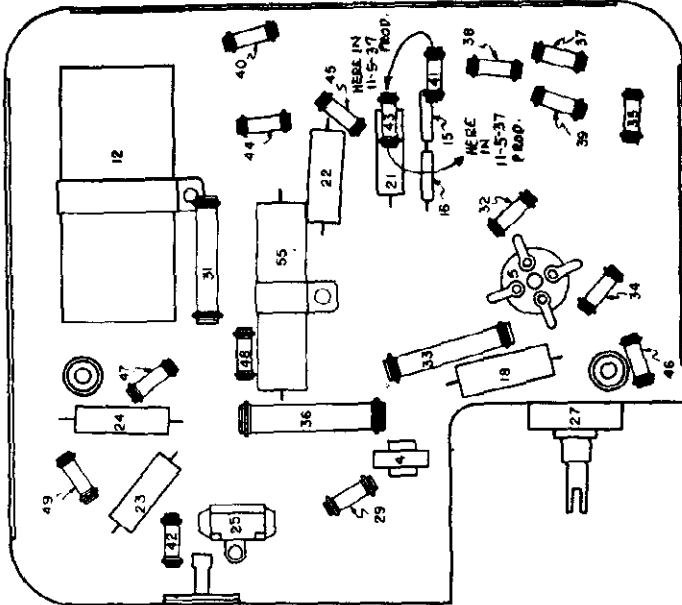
PARTS LAYOUT-BOTTOM VIEW
